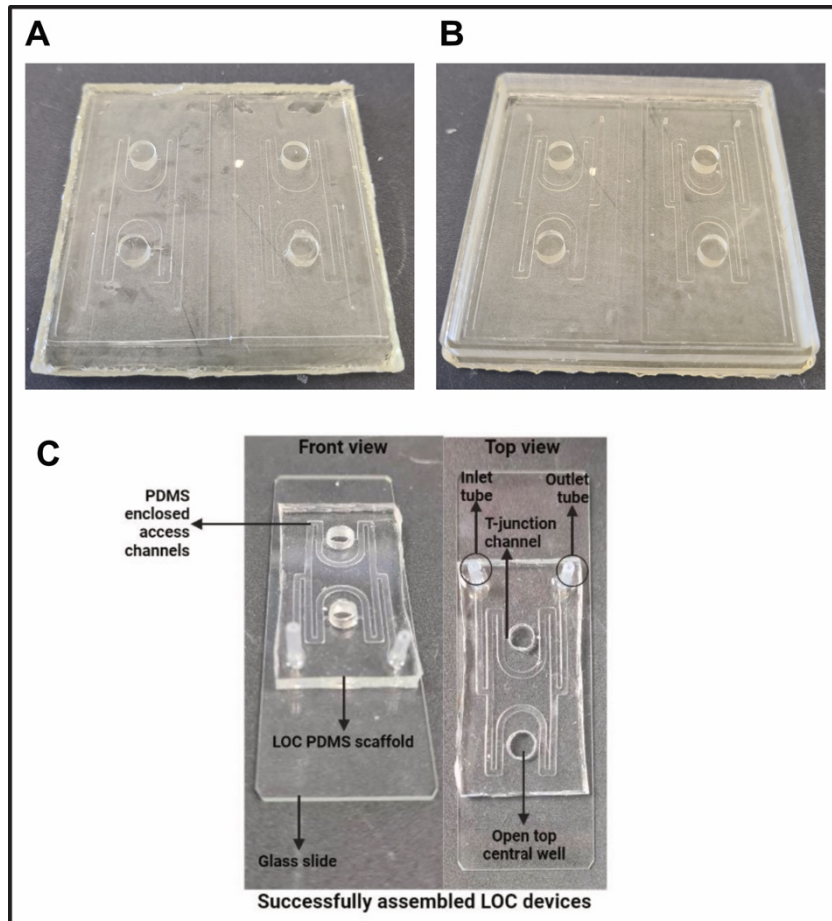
Design optimisation to include walls on the 3D printed mould and create more reproducible devices. A) 3D printed mould of the model 6. B) 3D printed mould of the model 7. C) Assembled chip with the design of the model 7.
